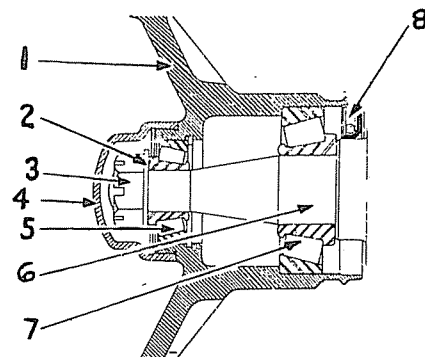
Sectional View of Typical Front Wheel Assembly.
